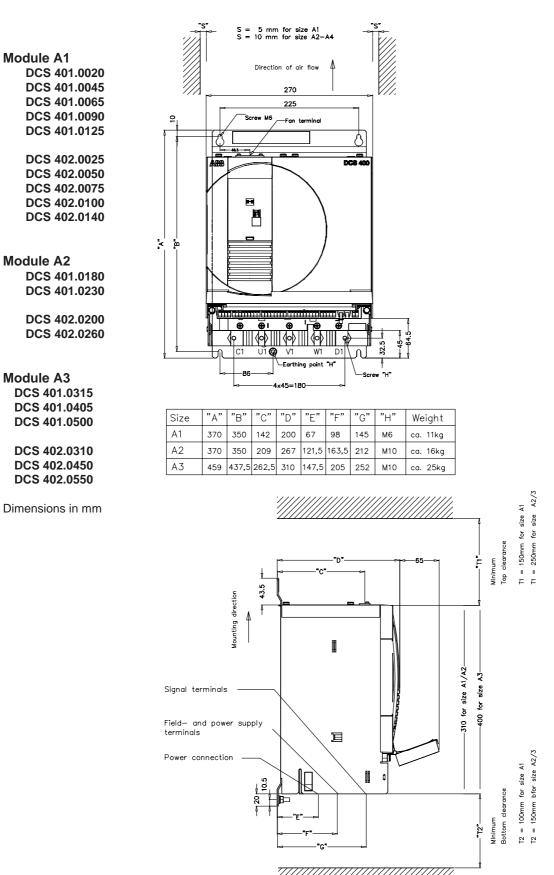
/1: Dimension drawing A1, A2, A3-Module
